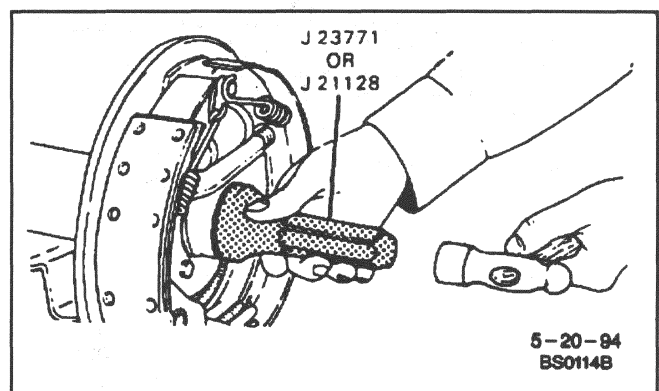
Installing Rear Axle Shaft Bearing Seal
